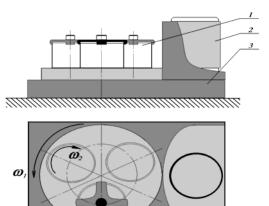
General view of the planetary centrifugal mill: 1 - drum, 2 - motor, 3 - platform.
